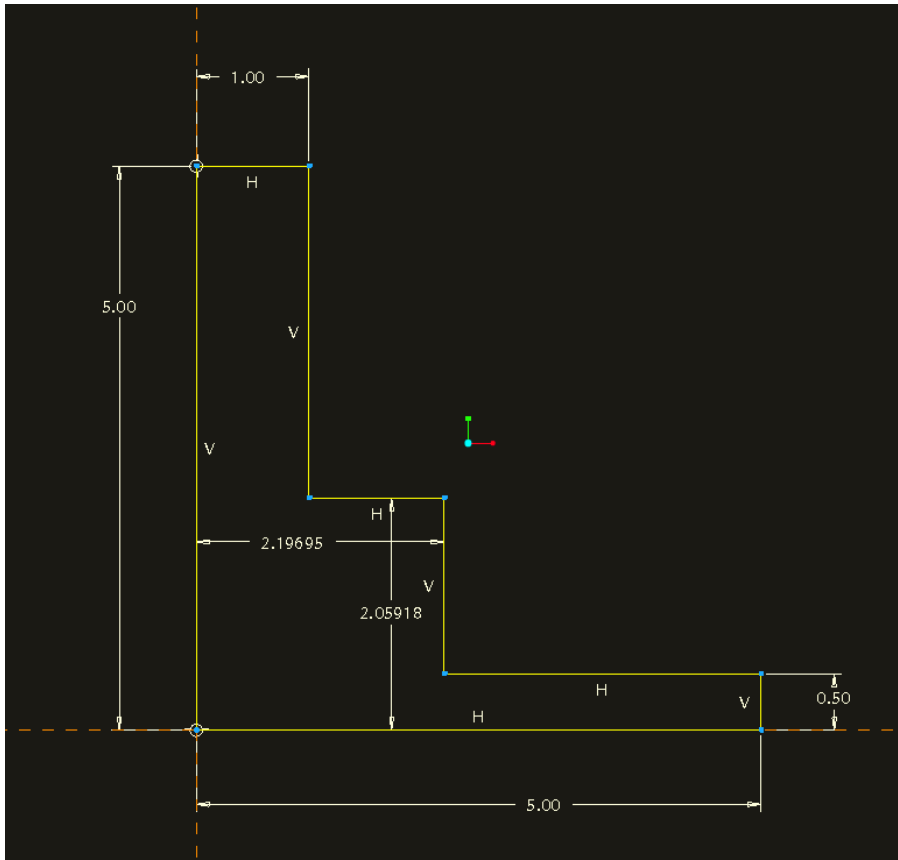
Individual Support Strut Assembly Step Dimension (mm)
